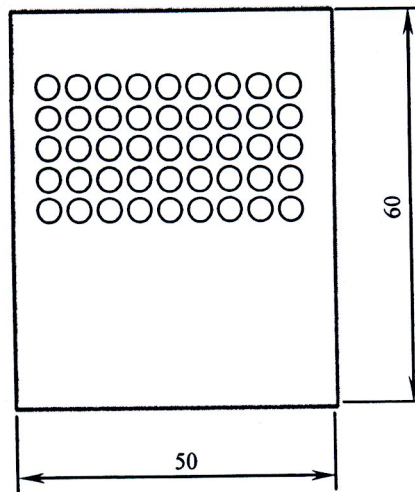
The drawing of the designed tube sheet (unit:cm)
